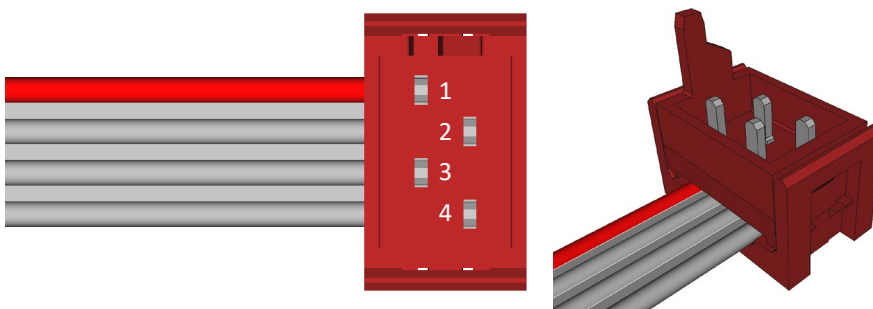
, 4 Pin Connector for 10/100 Ethernet (Red Wire Indicates Pin 1)
